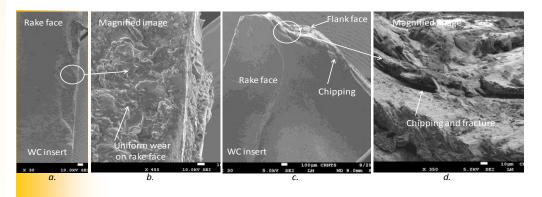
a-d Influence of machining environment on tool wear mechanism [6]
